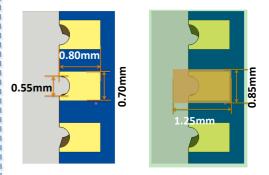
Dimension of SIDE LCC half-holes and recommended user client mounting pads
